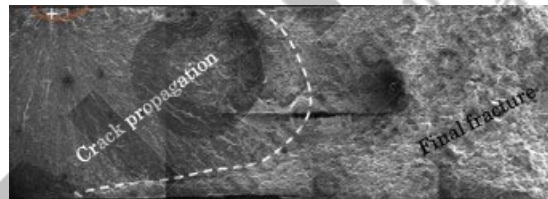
Scanning electron micrograph of fracture surface showing three stages of fatigue fracture (Sharma et al. 2014)
